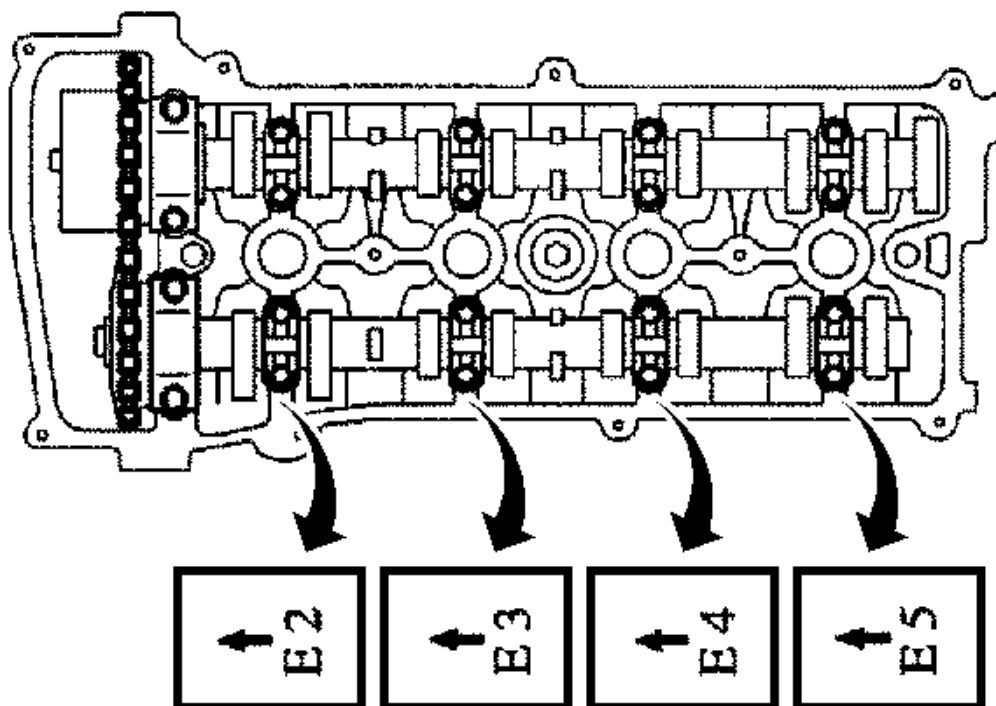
View Of Front Marks & Numbers On Bearing Caps
